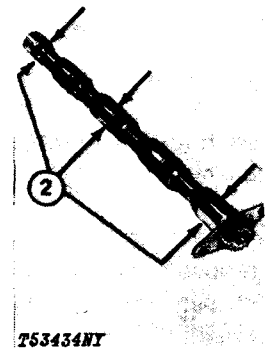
Balancer Shaft Journals and Bushings Measurement
